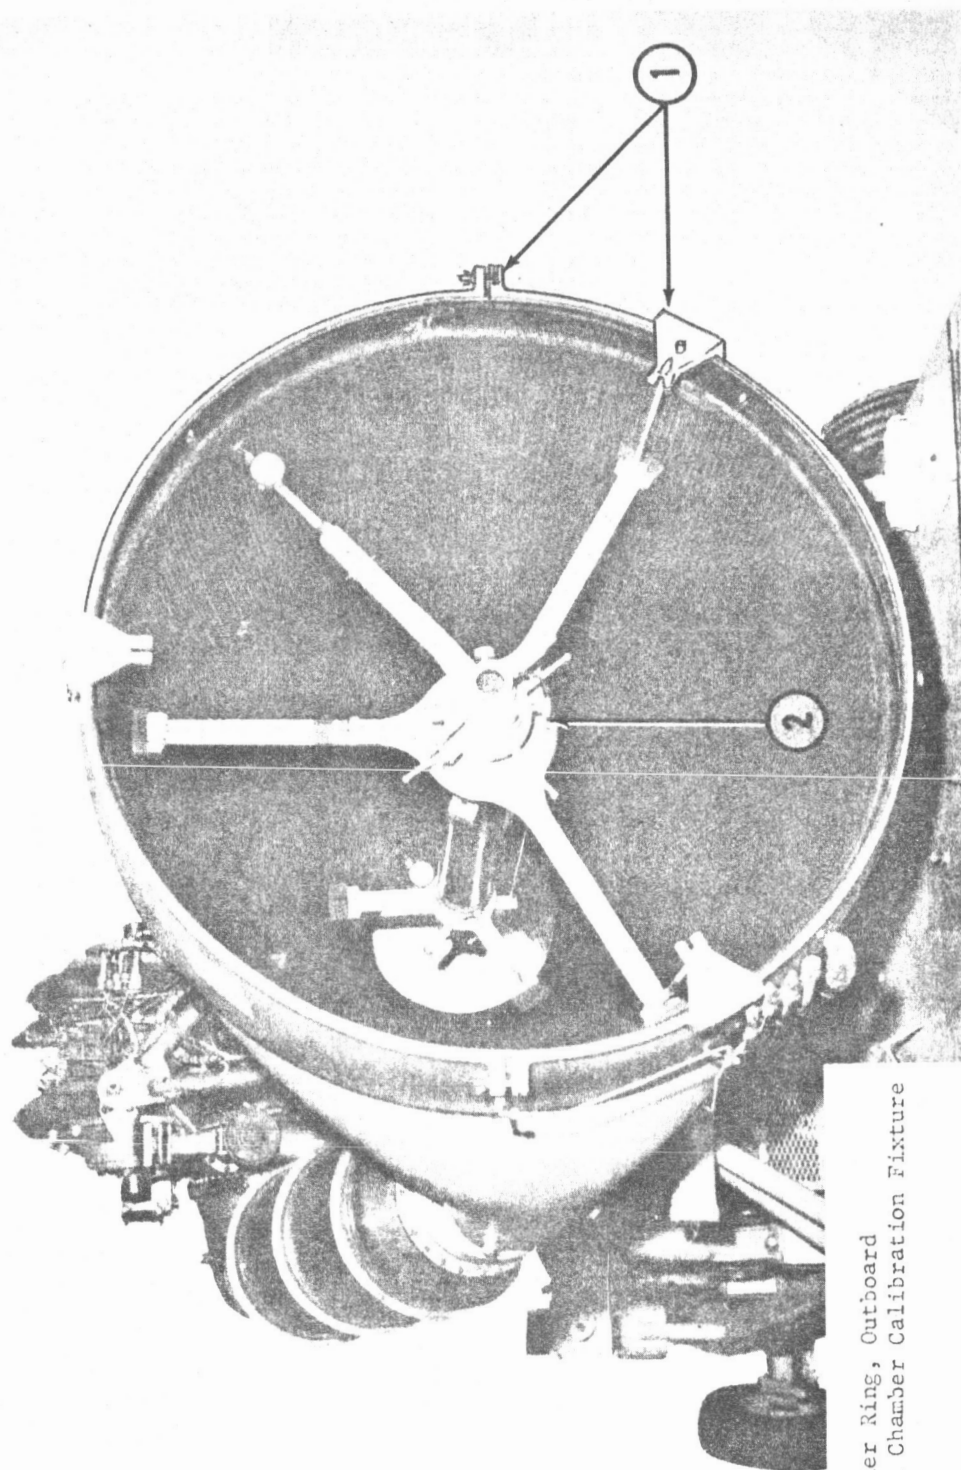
THRUST CHAMBER CALIBRATION FIXTURE
